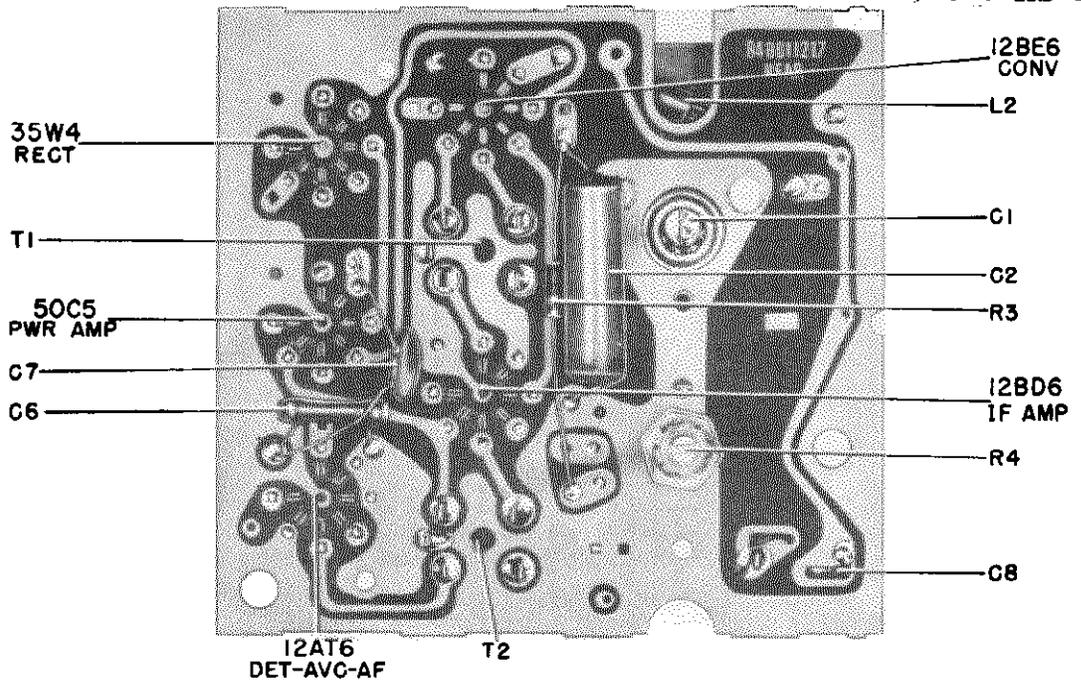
REAR VIEW OF CHASSIS - WIRED AND BLANK (LATE MODEL)
